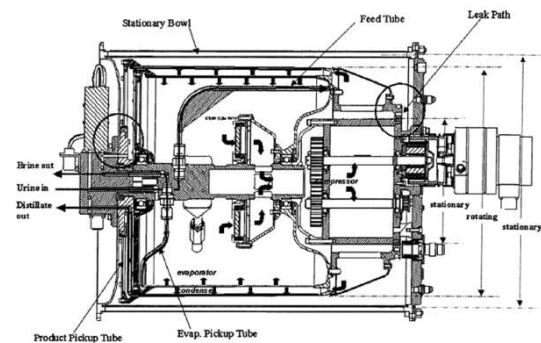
The ISS urine processor distillation assembly employing 60NiTi ball bearings.
